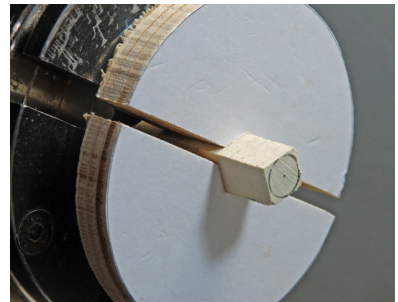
Checking the aux jaw set for accuracy by marking a sample pen blank.
